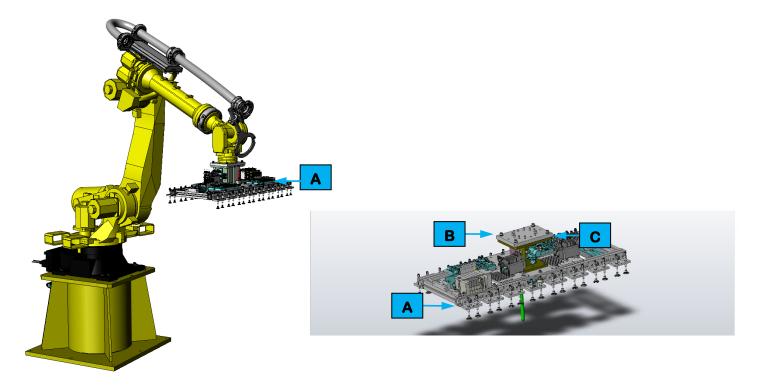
Illustrations of the Cell Handling Robot end of arm tooling.
